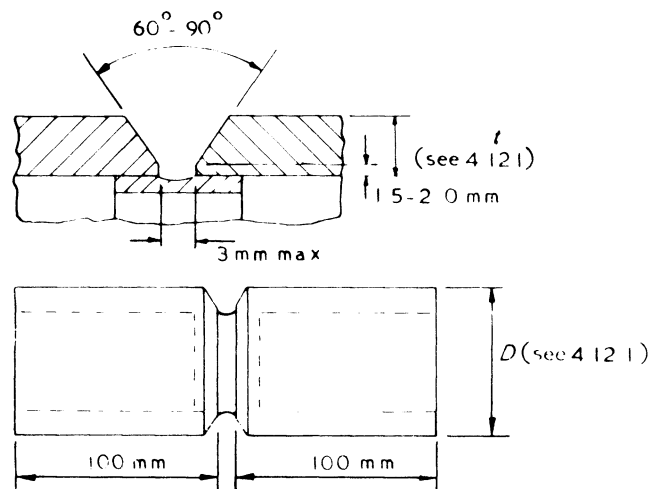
Test piece for butt weld in pipe (with temporary backing)
